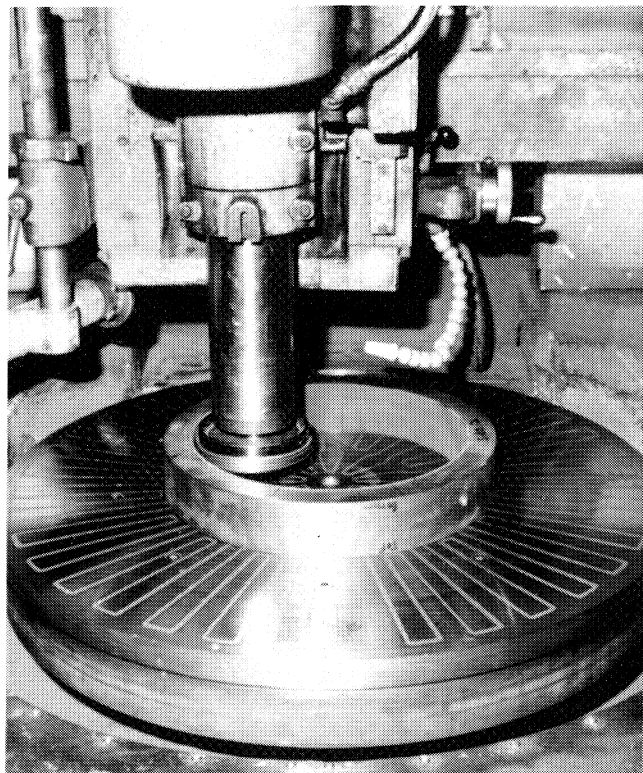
Overall View of Test Ring Coated with Silicone on Magnetic Table of Grinder. Test rotor on lower end of spindle.
